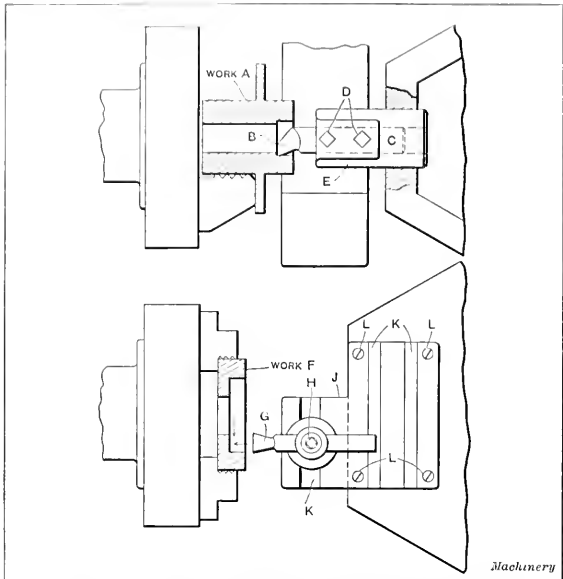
(Upper View) Single-point Starting Tool; (Lower View) Boring and Facing Tool
